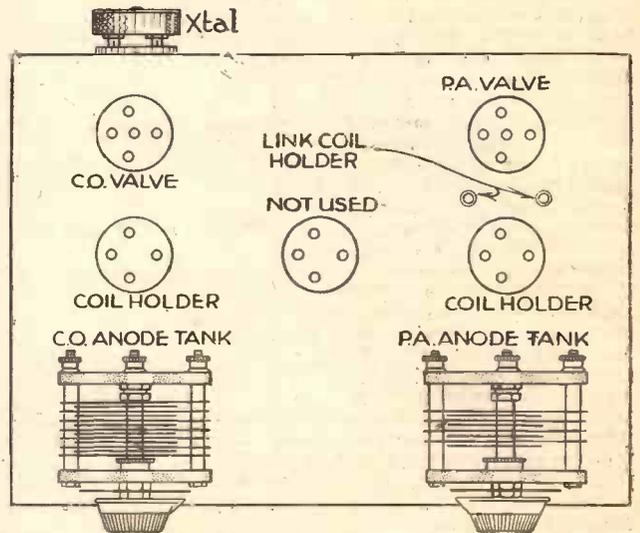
How the original oscillator chassis is modified to allow the P.A. stage to be added.
